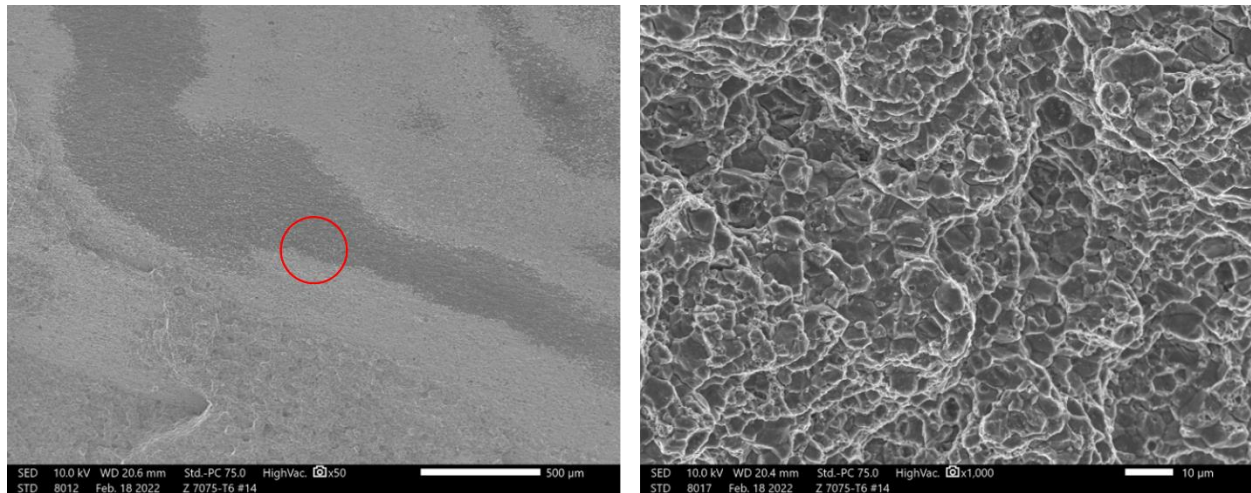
The fracture surface at 50X (left) and the fracture surface at higher magnification showing a smooth appearance 1000x (right).
